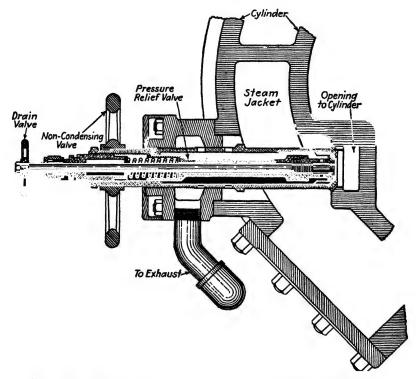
Cylinder relief valve of the Elliott condensing unaflow engine.
